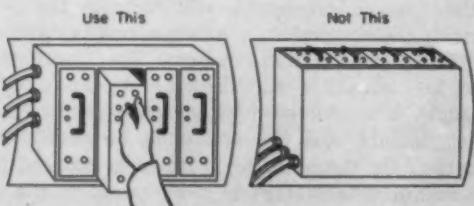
Design and install major units of electronic equipment to permit removal of subunits without removing the major units.
